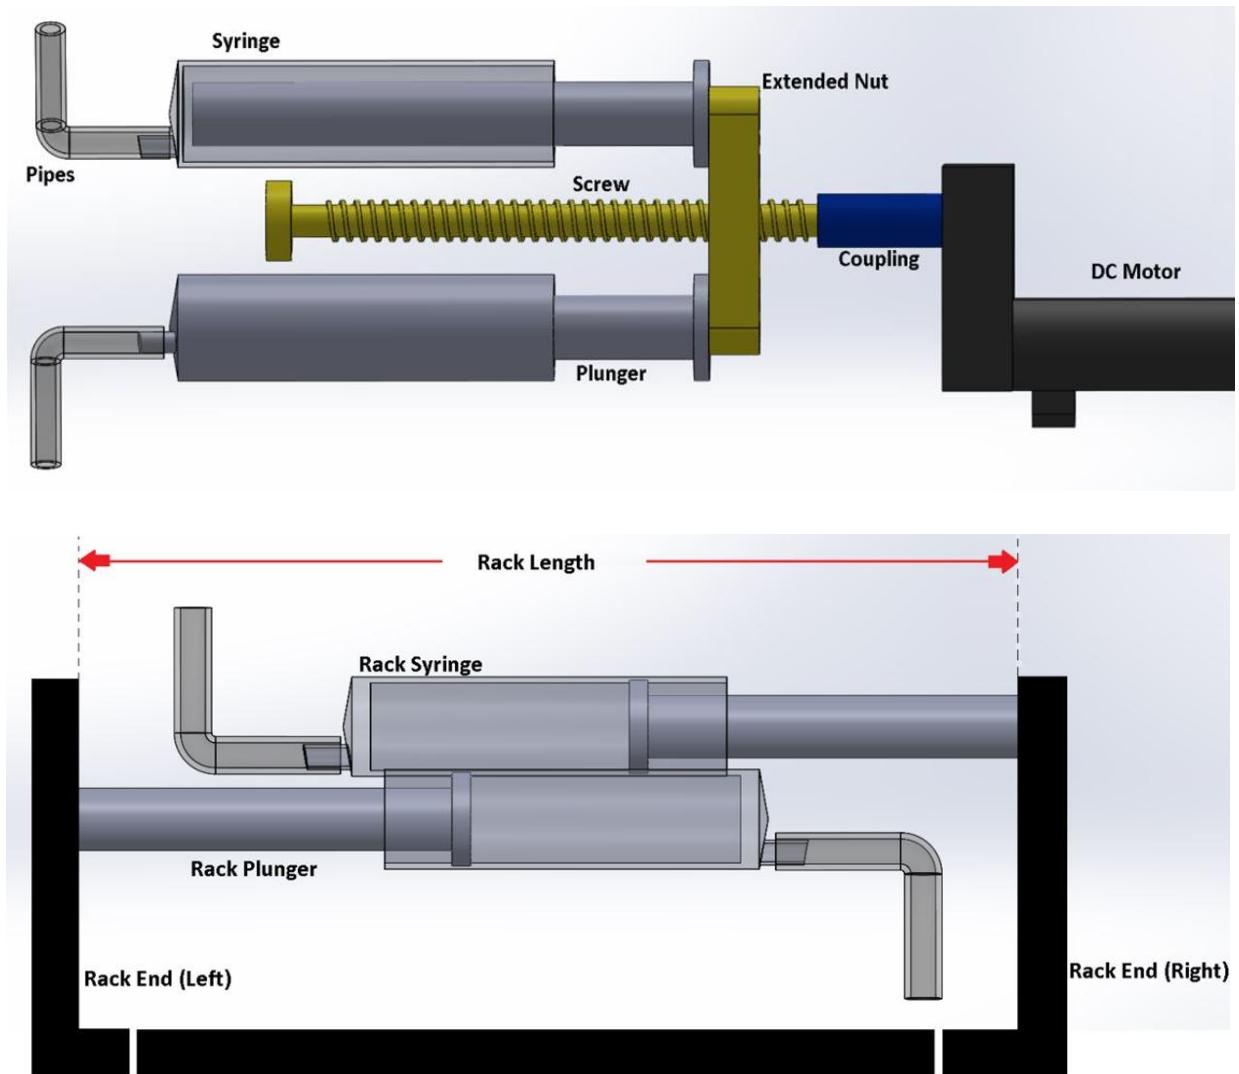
Hydraulic Assembly to Actuate the ZTS (a) Control End (b) Rack End
